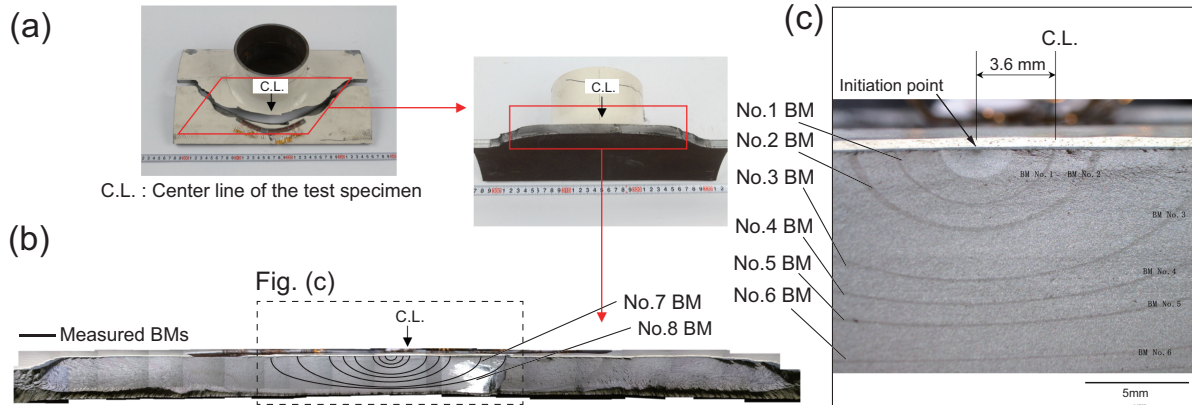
BMs on the fracture surface: a Fractured specimen, b Fracture surface and BMs, c Close-up view of BMs
